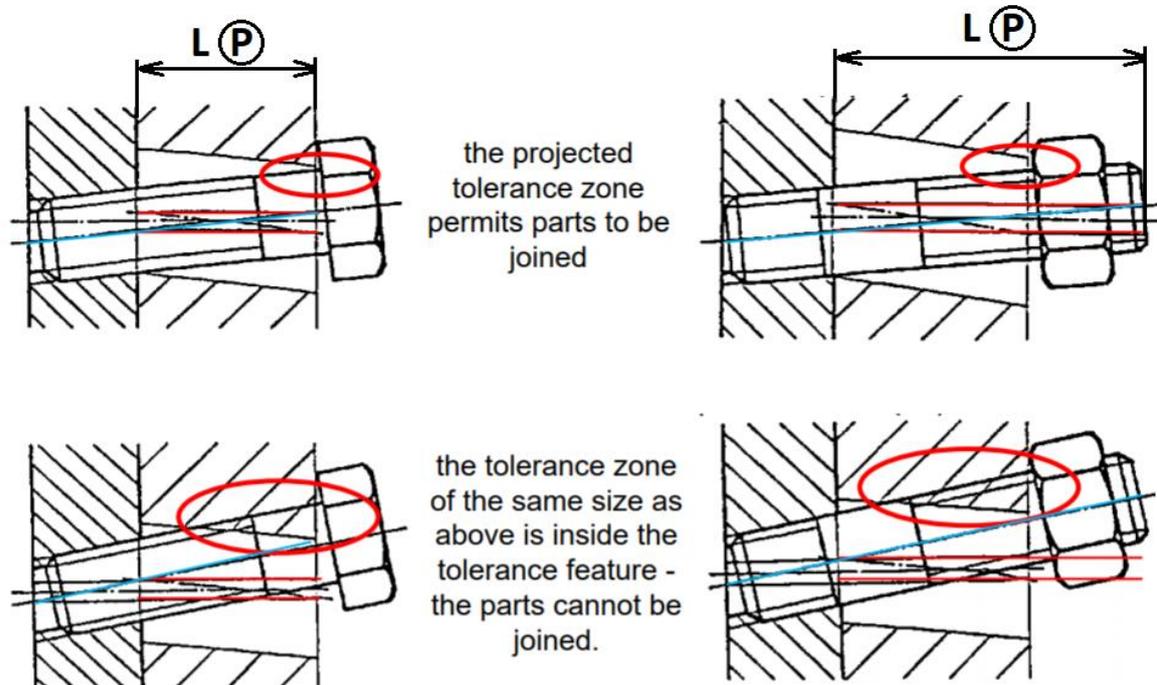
Example and analysis of fastening two centering flanges using the projected tolerance zone [15]
